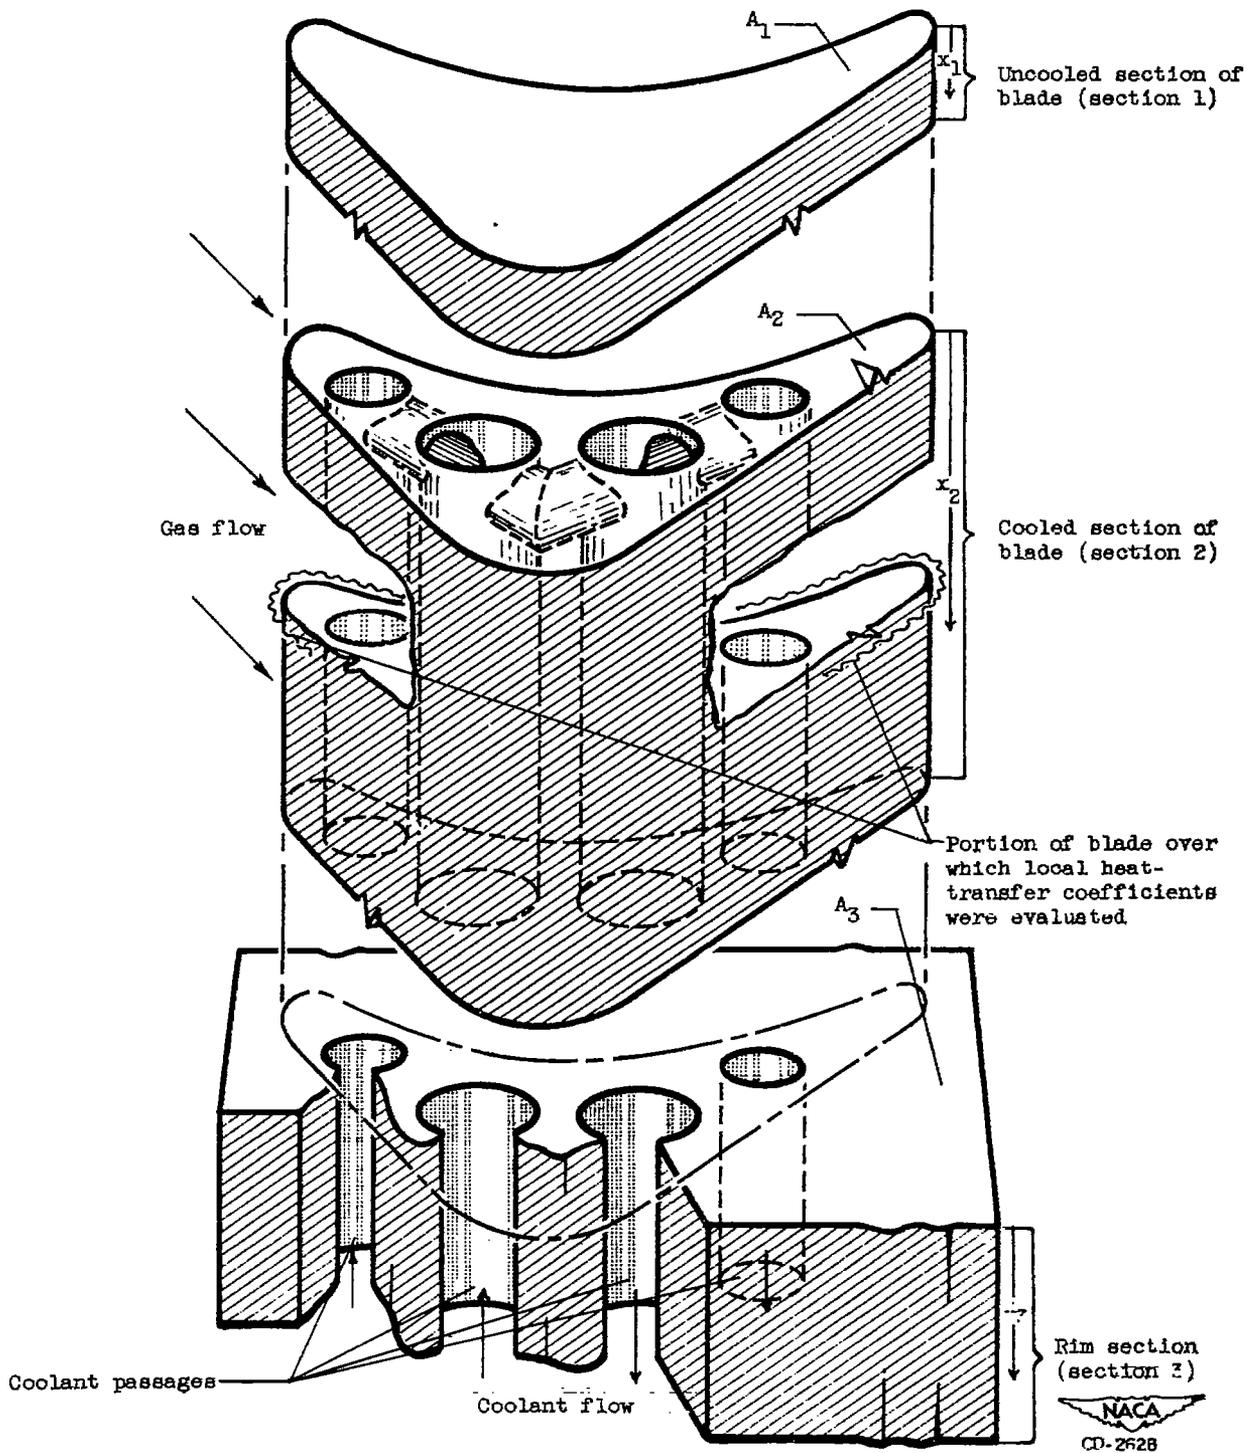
Exploded view of the forced-convection, water-cooled aluminum turbine showing sectional arrangement used in blade-temperature calculations.
